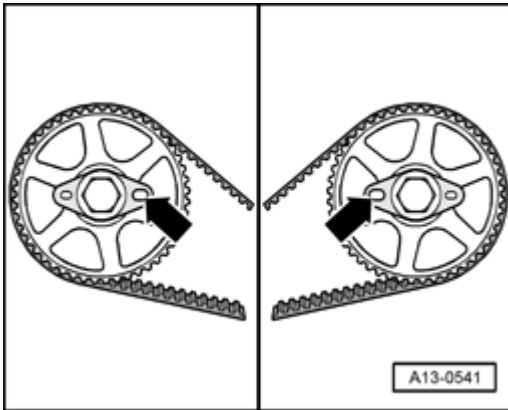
Identifying Large Holes On Securing Plates At Camshaft Gears Aligns On Inside
